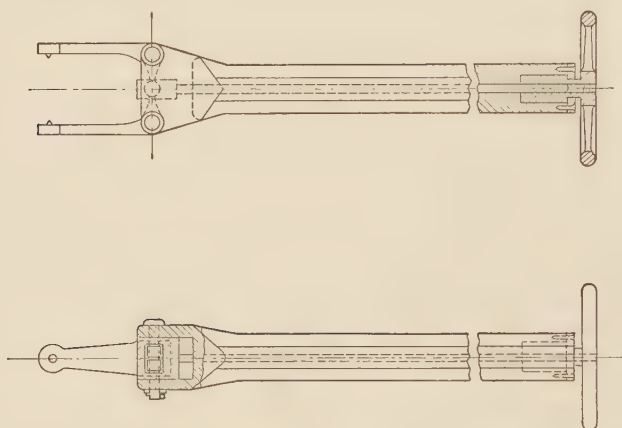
Tong-hold porter bar. Turning of the handwheel attaches the bar to the bloom, or disengages it.
